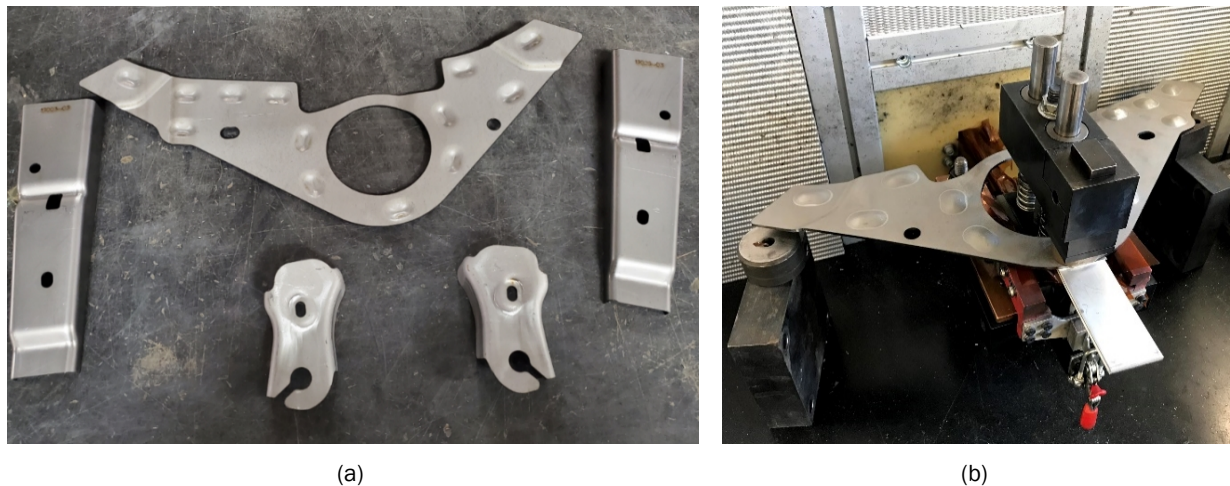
VFAW of subcomponent with: (a) stamped steel subcomponents; and (b) welding setup using pre-prototype fixture. Source: The Ohio State University.
